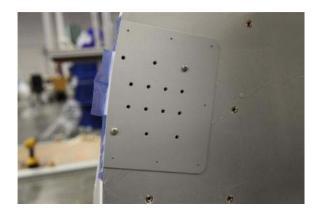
Inserts Around a Cutout for a Fitting (Inserts in center of panel for attaching wire bundles)
